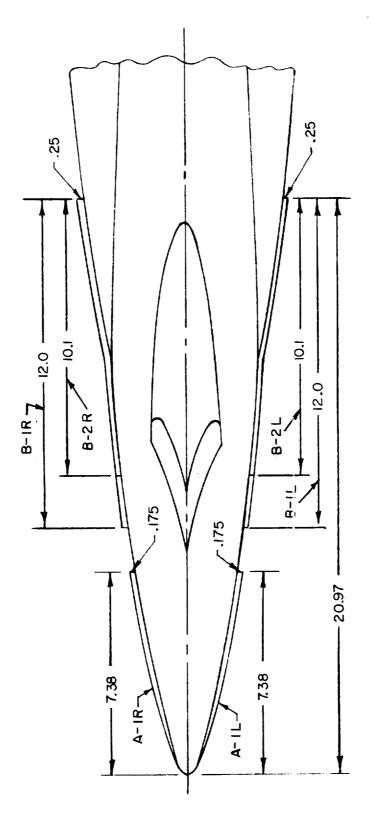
Sketch of nose of model indicating size and location of strakes. (Strakes located on fuselage reference line; all dimensions are in inches.)
